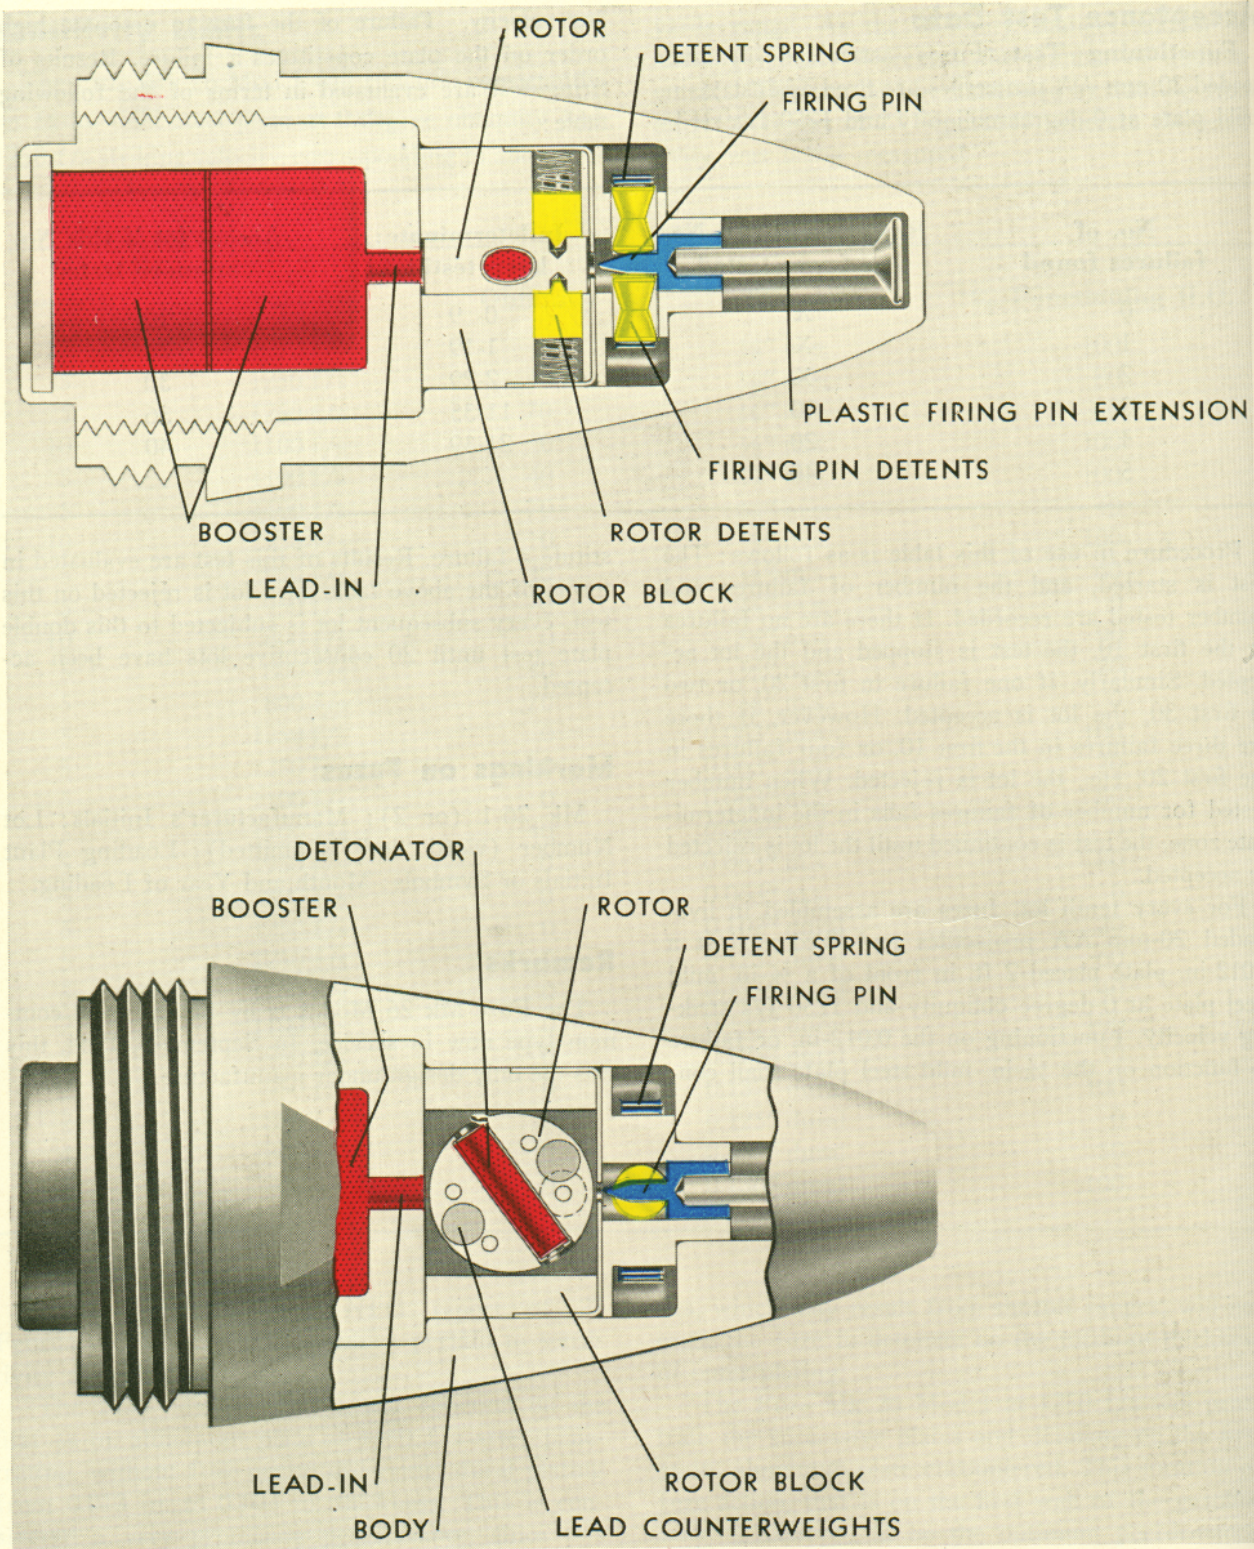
Point Detonating Fuze Mk 27—Sectional View
